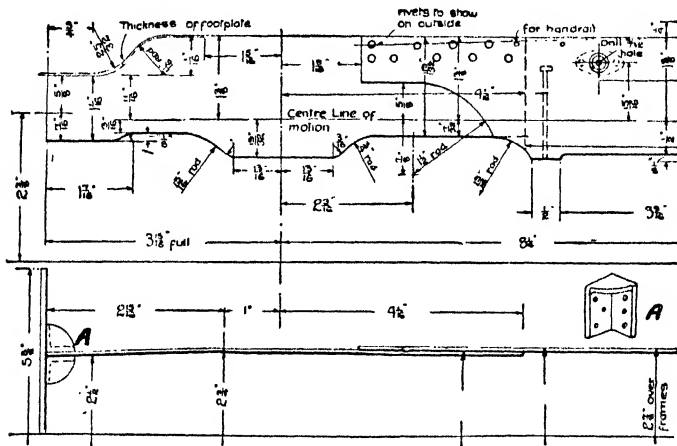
Main Frames for a 3½-in. Gauge L.N.W.R. Model 4—4—0 Locomotive.
